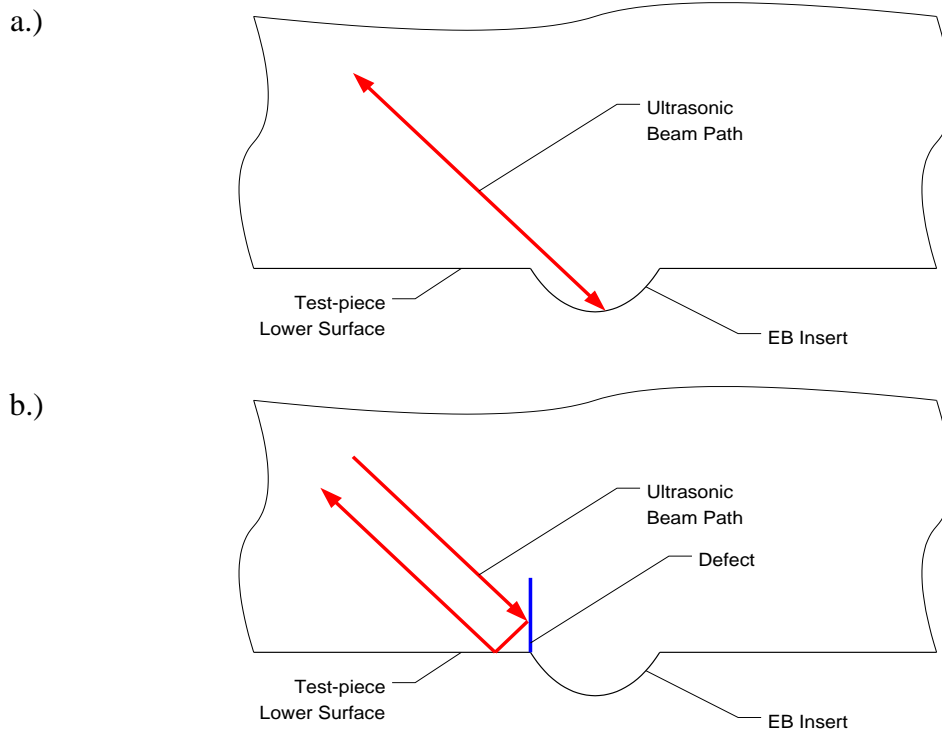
Schematic diagram of the inspection of a.) a non-defective root in the flat plate welded test-pieces and b.) a root defect.
